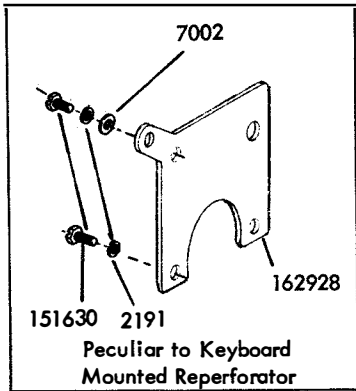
TAPE FEED - OUT ASSEMBLY
